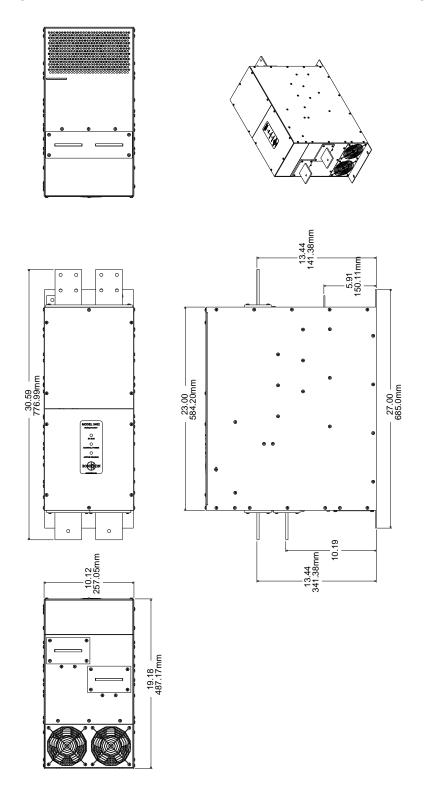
M3452 T10 Chassis Dimensional Outline Drawing
